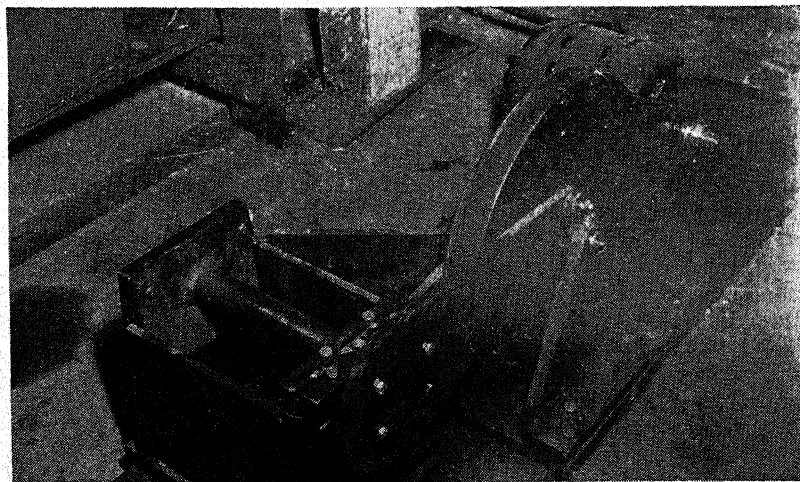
Tube, with plate welded at each end, in repeated shear testing machine.
